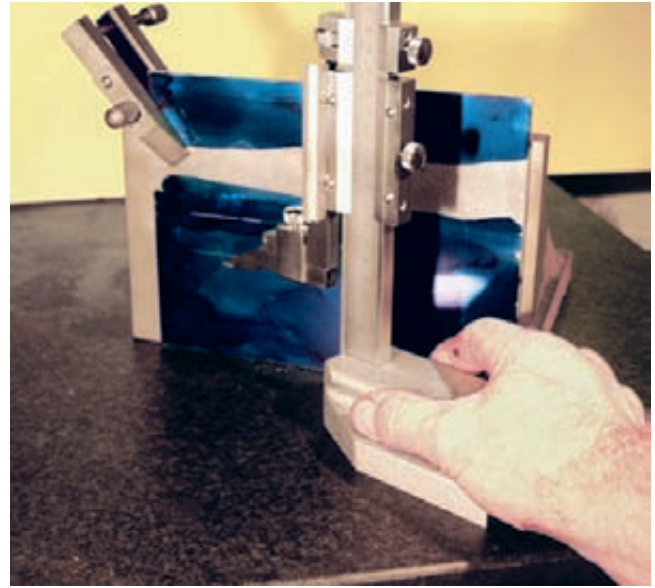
Scribing layout lines with the workpiece clamped to a right-angle plate.
